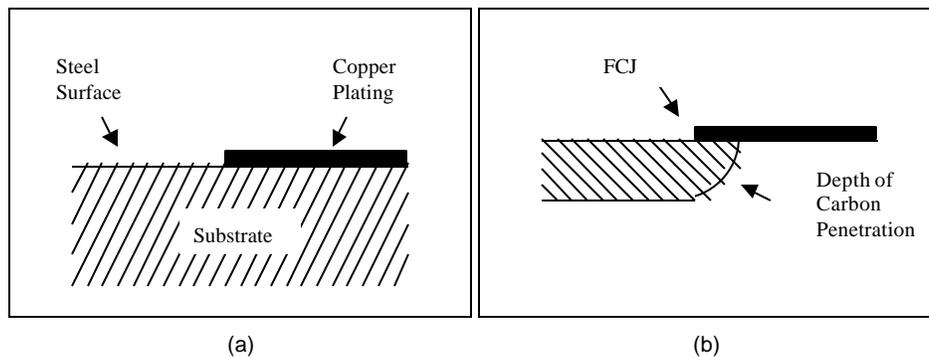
(a) The surface of a steel component that has been copper plated. The geometry shown illustrates the area where the copper plating meets the steel surface. This geometry is idealized; the
